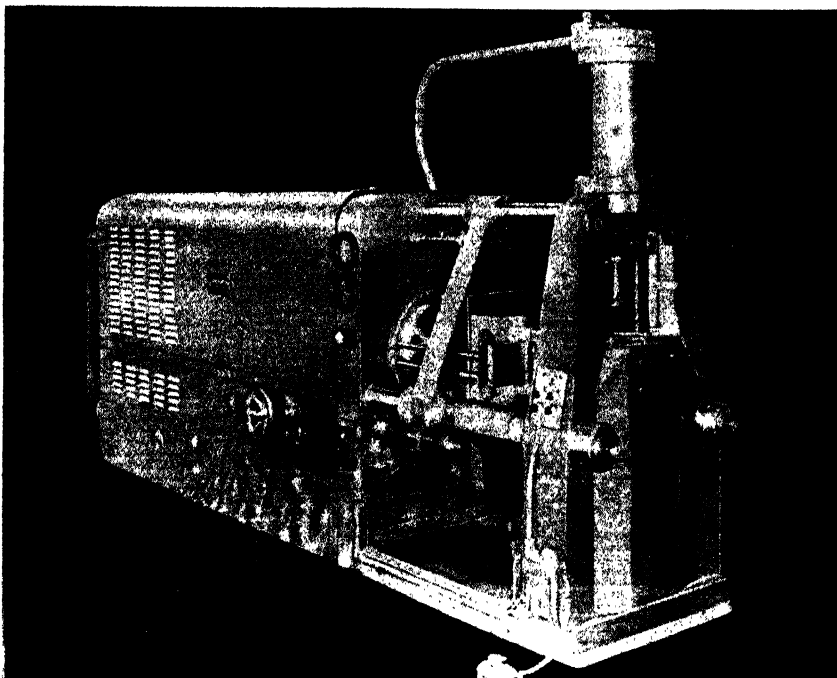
Pre-casting machine by Hydropress Inc., New York.
